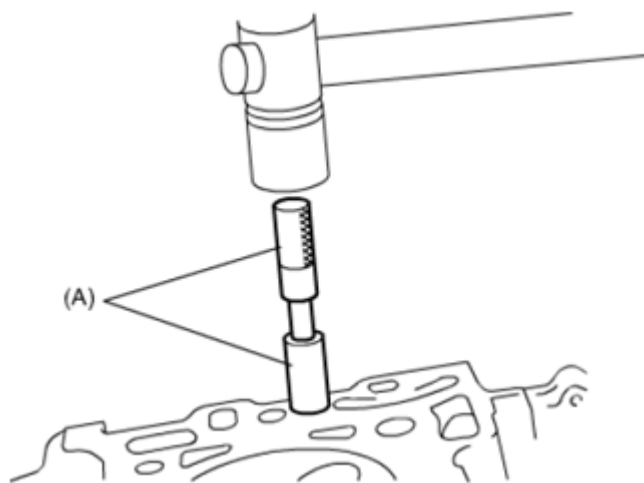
Removing Oil Relief Valve From Cylinder Head
